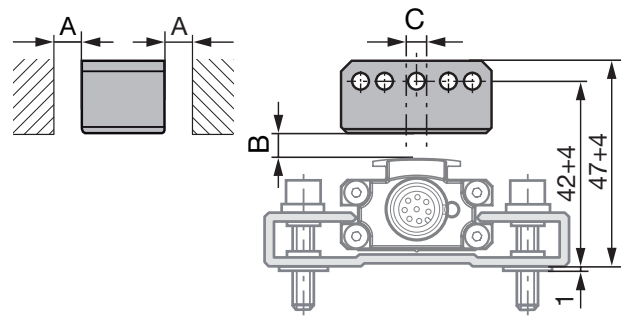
Dimensions and distances with BTL6-A-3801-2 magnet
